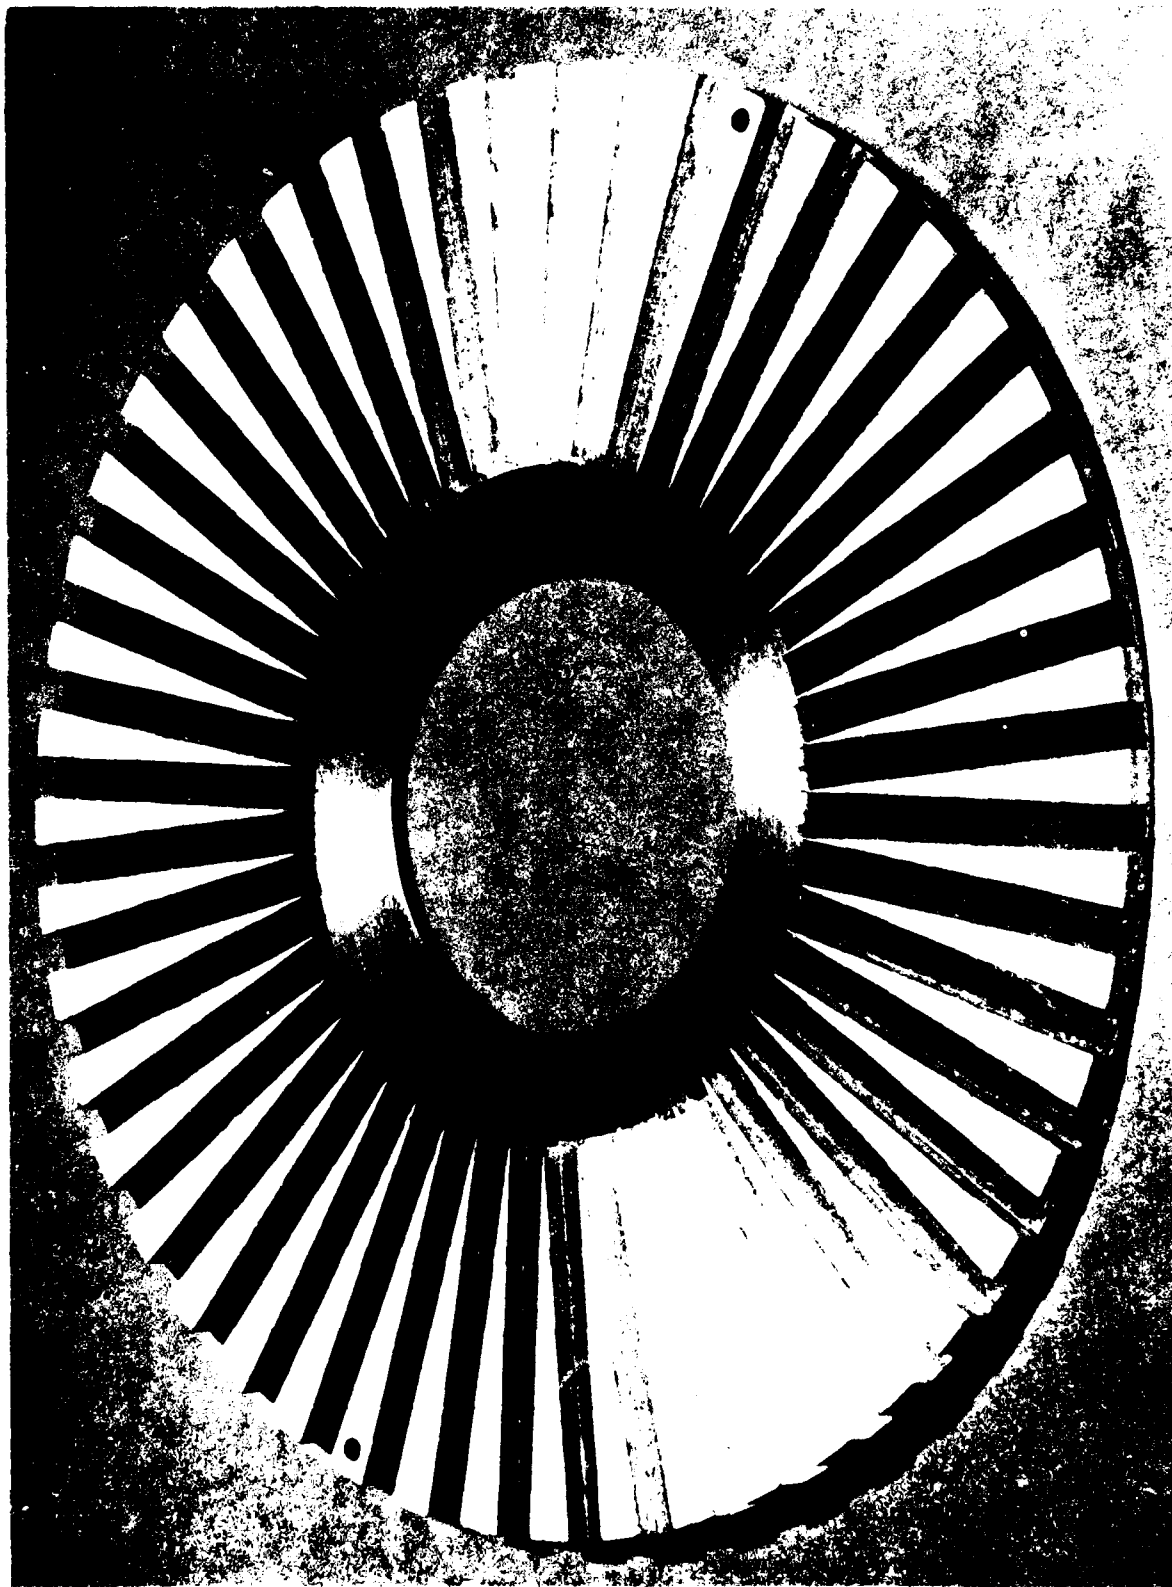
Photographic View of Diffuser Plate (Tapered Channels)
